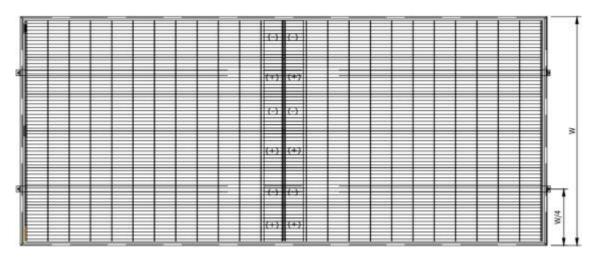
INSTALLATION WITH CLAMPS INTO 4 INNER HOLES. BEAMS PERPENDICULAR TO SHORTSIDES
